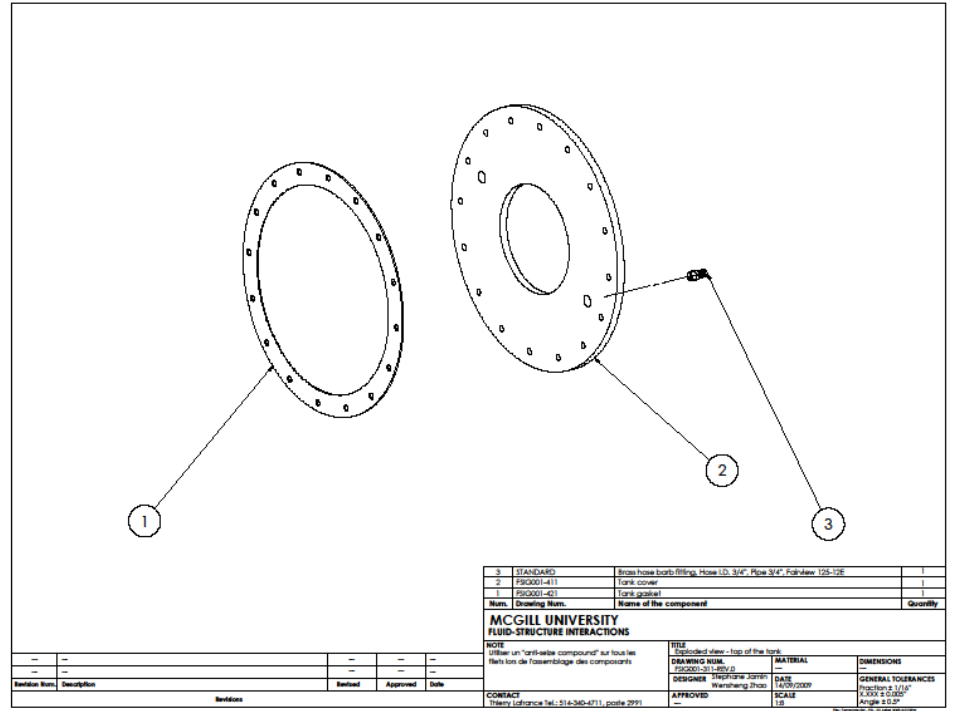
Sub-assembly drawing for the tank: Top of the tank
